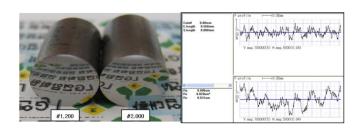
Photograph and surface roughness profile of sphere workpieces
